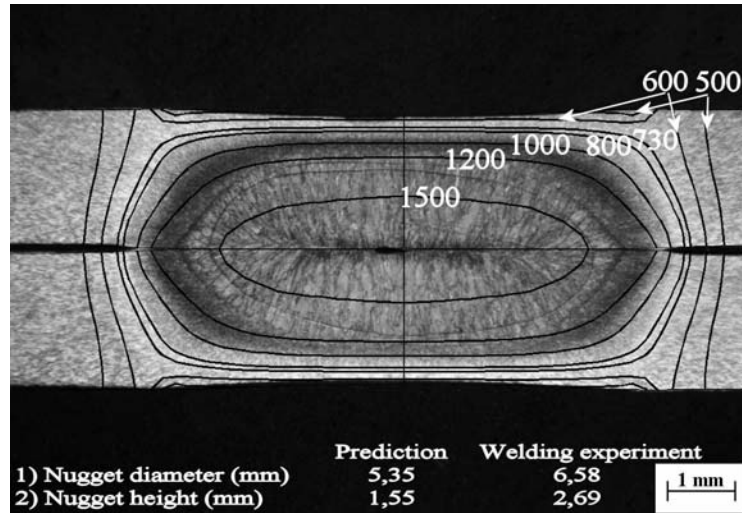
Final weld geometry validation at the lower domain of weldability (Welding condition: 400daN-8,4kA/4(6+2)-TH8: AKDQ@2mm-thick non-coated sheet)
